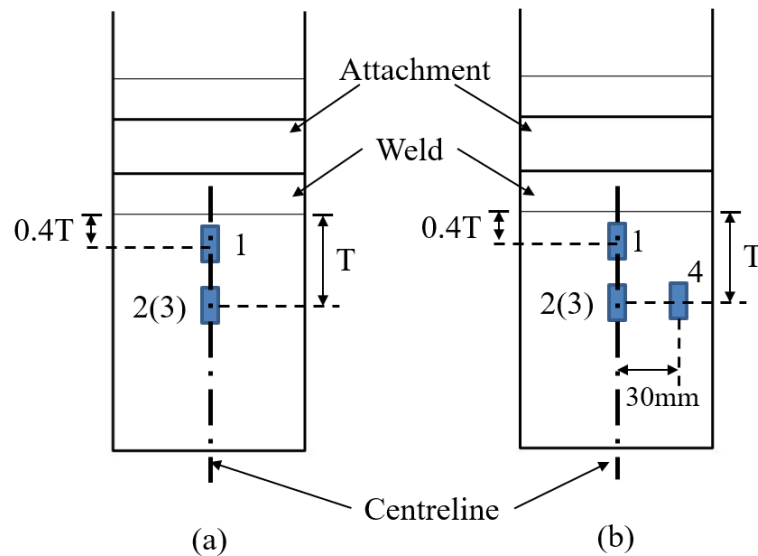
The arrangement of strain gauges on the specimens tested in a) axial loading and b) bending loading (gauge 3 opposite to gauge 2).
